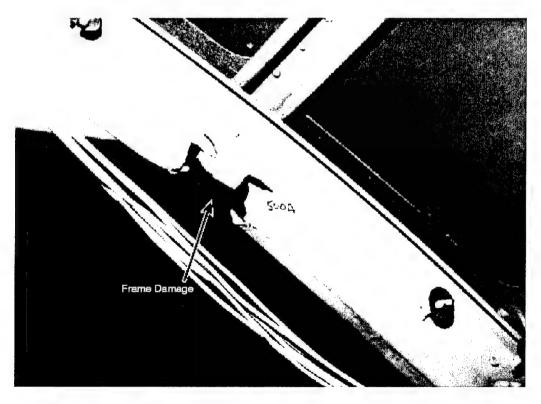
FRAME DAMAGE AT HANGING RAIL ATTACHMENT POINT FS 500
